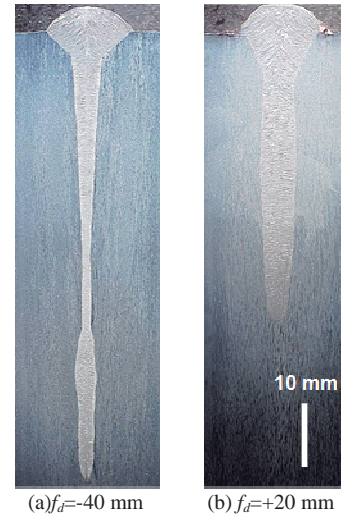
Cross sections of Type 304 weld beads made with disk laser at 26 kW, 0.3 m/min and 0.1 kPa, showing formation of sound deep-penetration weld.
